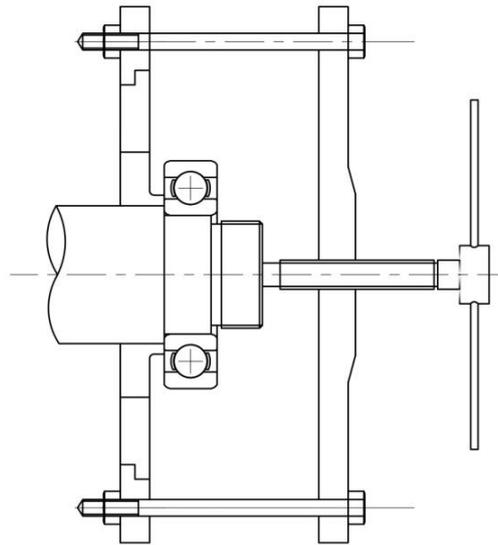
Removal of Inner Ring Using Withdrawal Tool (1)
